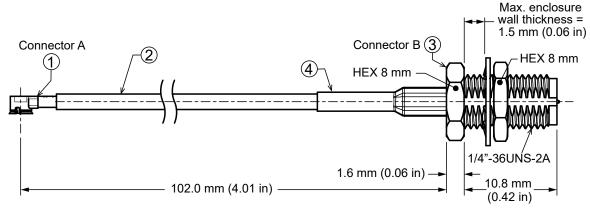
Product Dimensions for the CSB-RGFB-102-UFFR Cable Assembly
